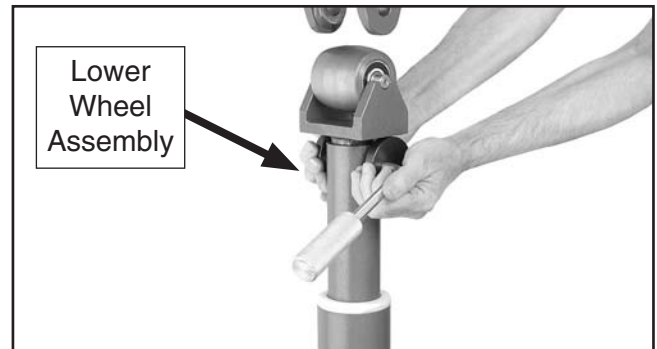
Wheels positioned to accommodate different workpiece sizes.
